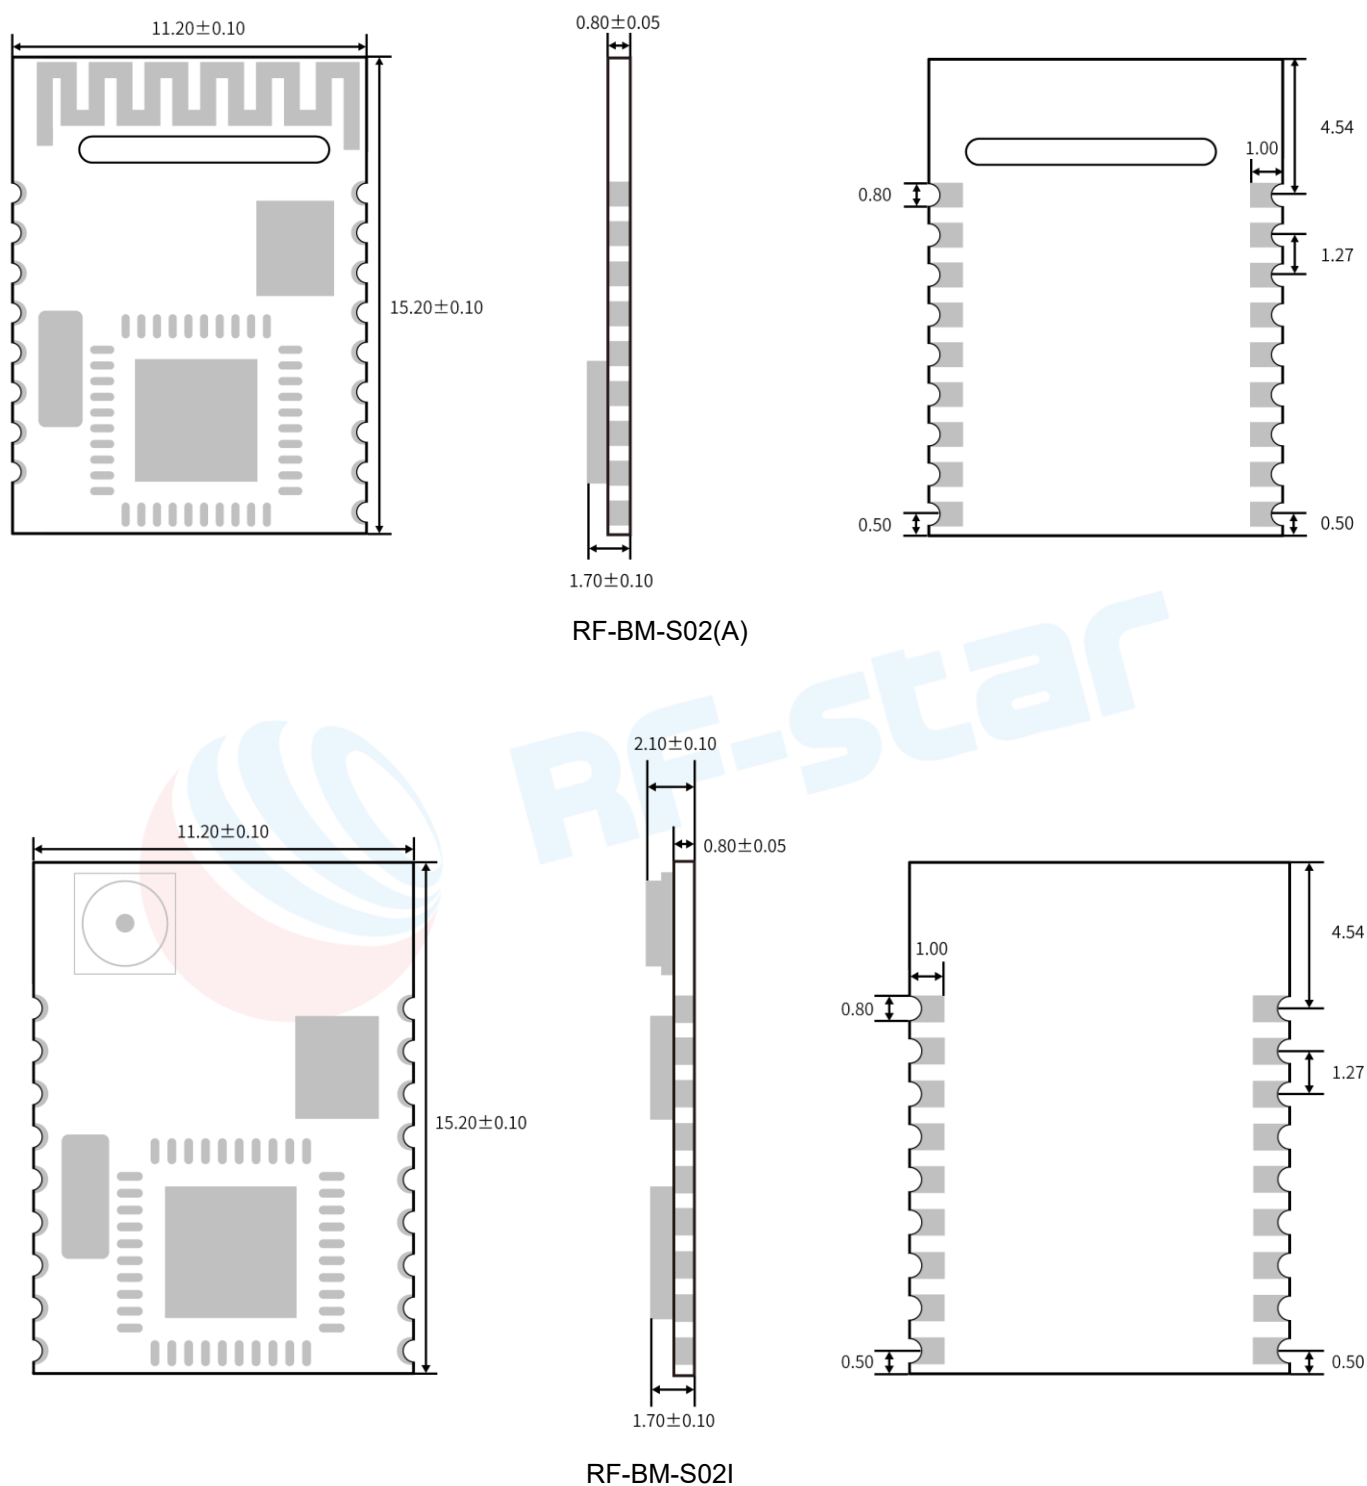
Recommended PCB Footprint of RF-BM-S02 (mm)
